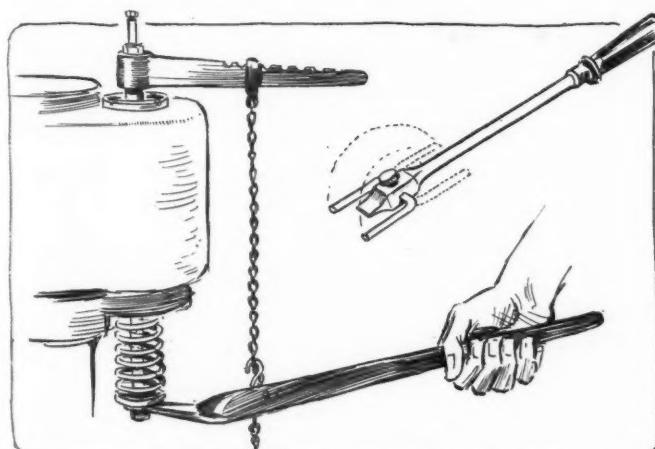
Winsor valve removing tool which is adjustable to any size of cylinder. At the right, Two-Way valve tool for use as a valve grinder or as a simple screwdriver
